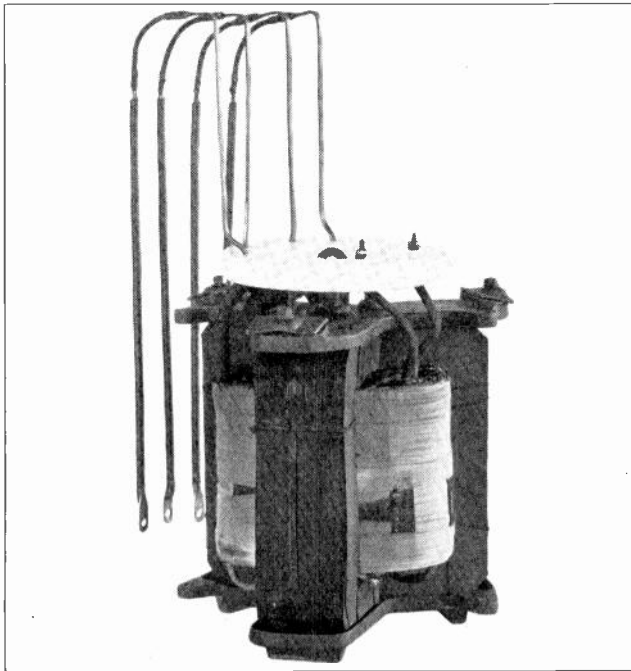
Complete transformer core and windings. Note how the legs of the core are assembled to form complete magnetic paths around the coils. (Photo Courtesy General Electric Co.)
